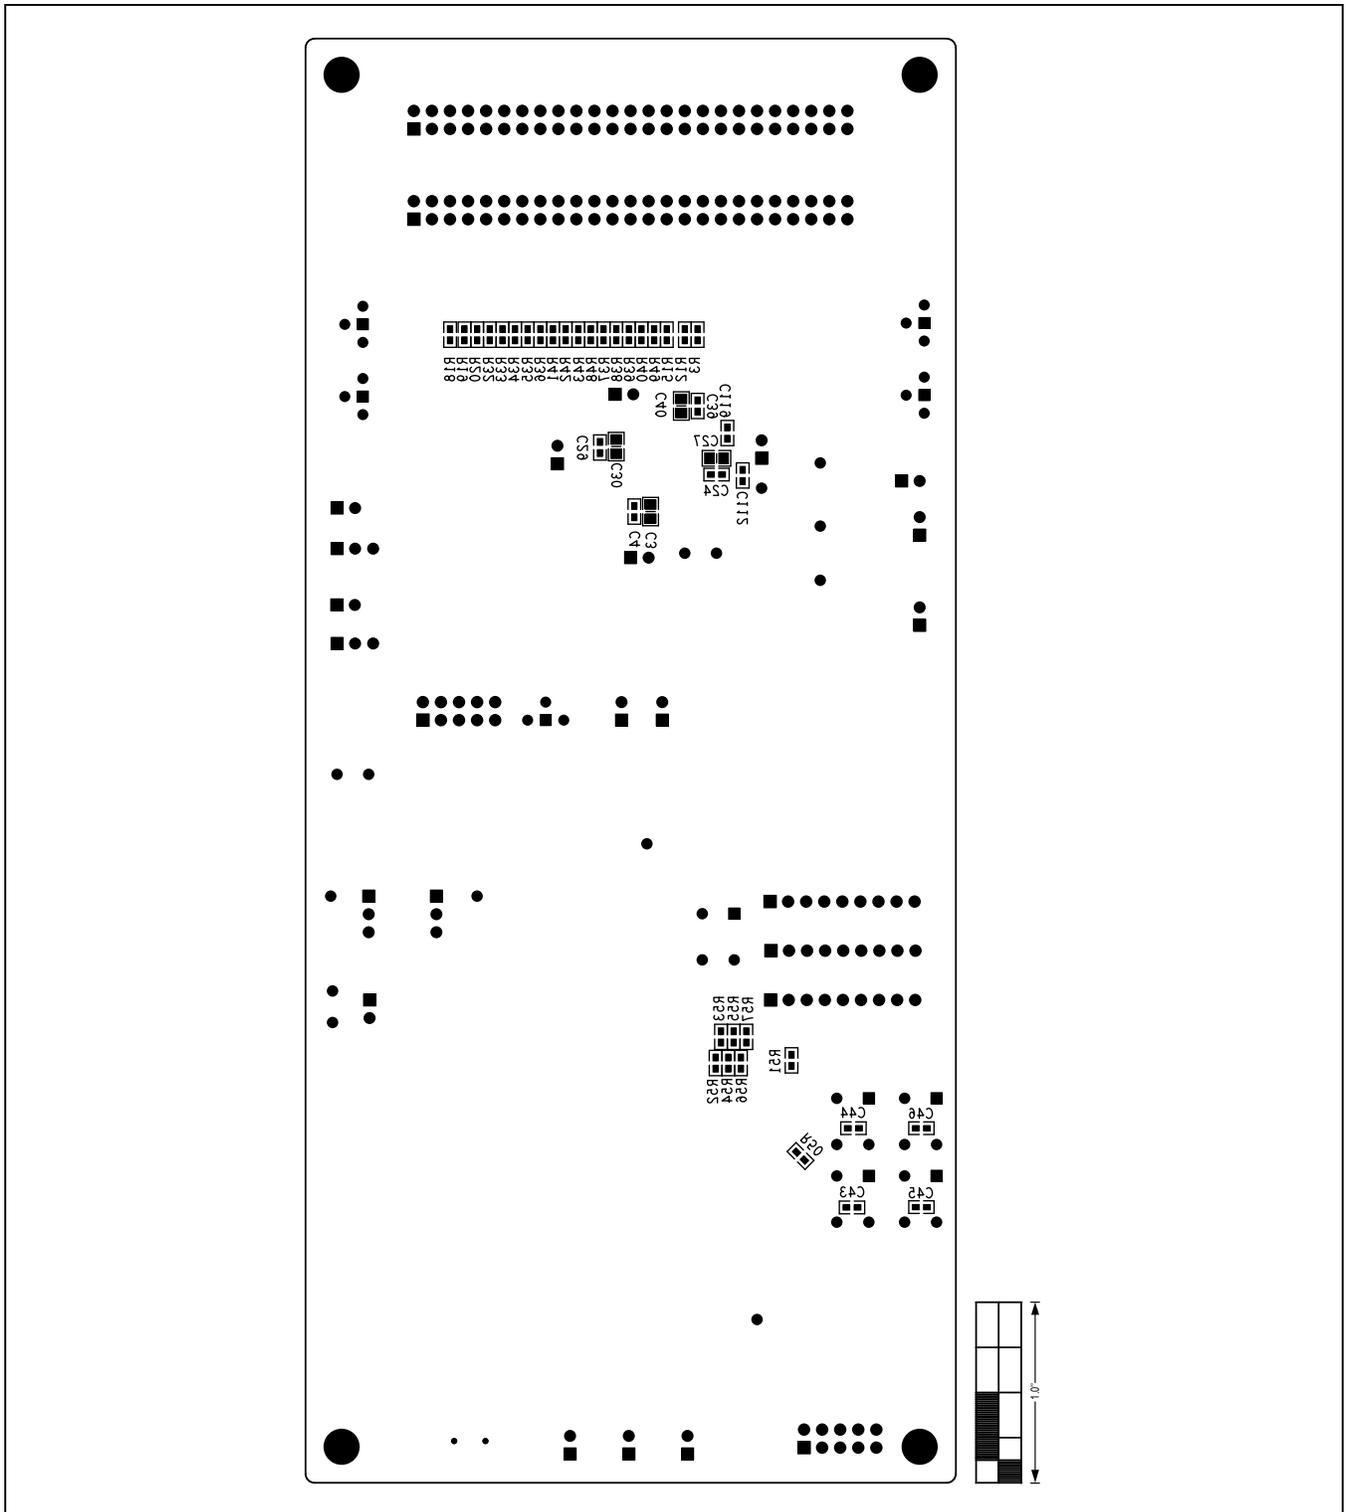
MAX11300 EV Kit Component Placement Guide—Solder Side
